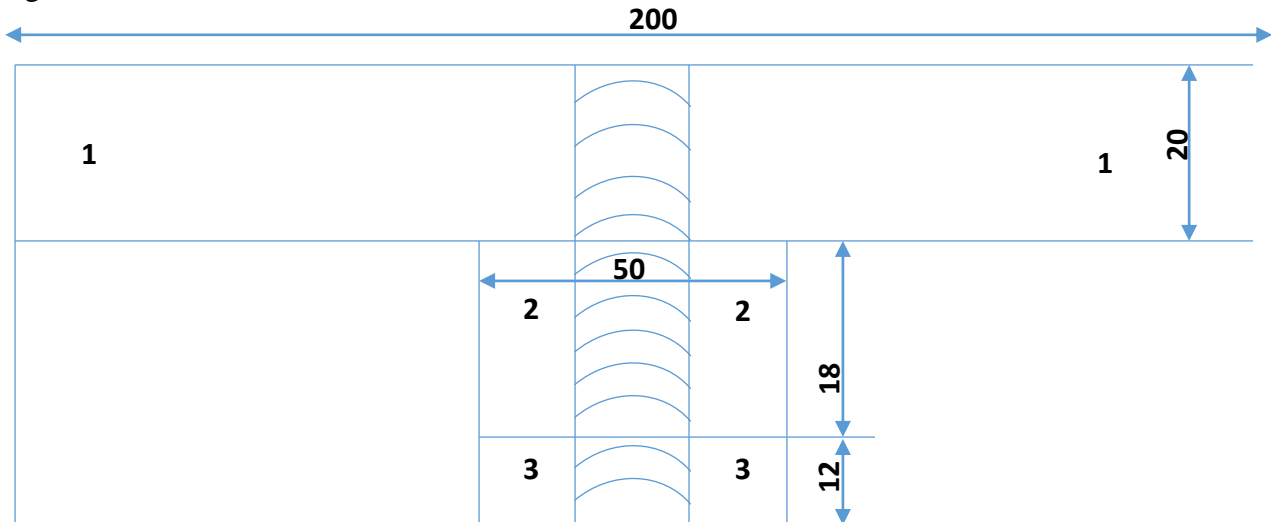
Marking and cutting plan of welded specimens (all dimensions in mm)
